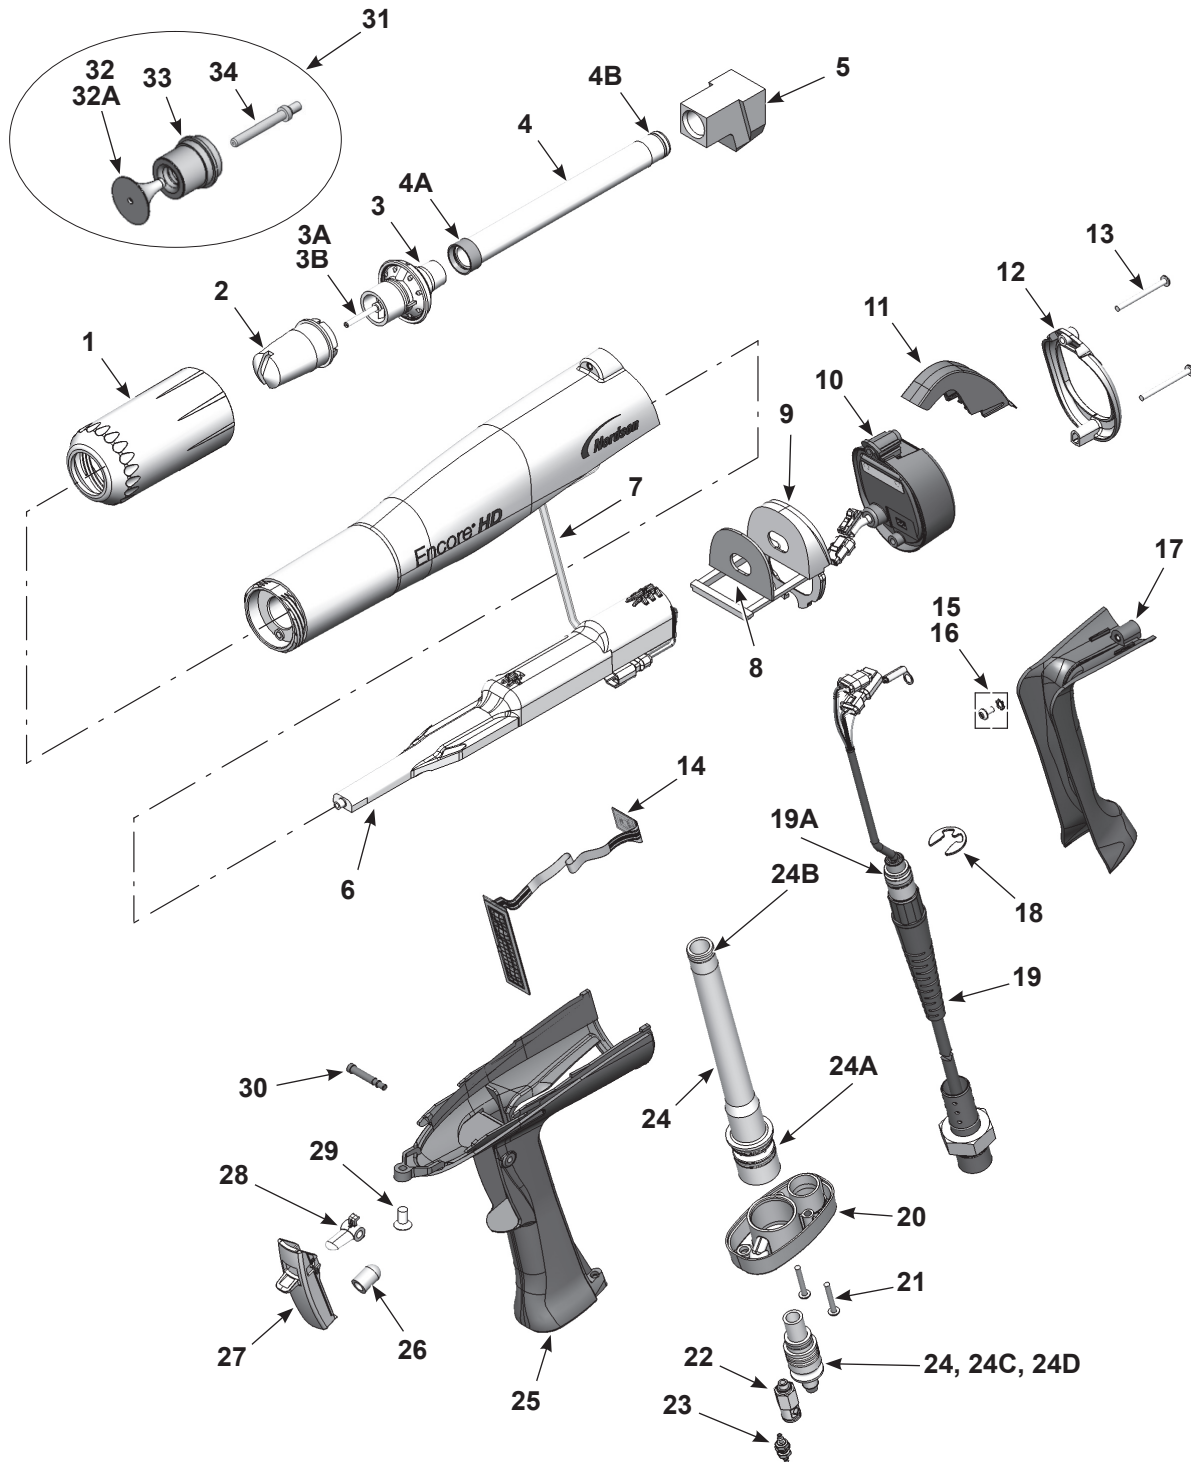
Encore HD Manual Spray Gun and Accessories Parts
